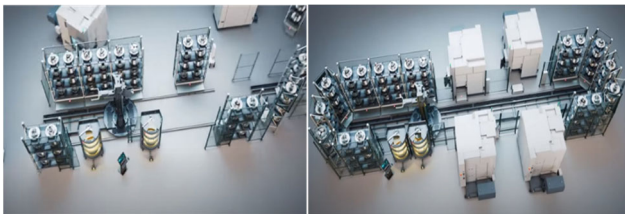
Examples of reconfigurable linear and circular pallet magazines
